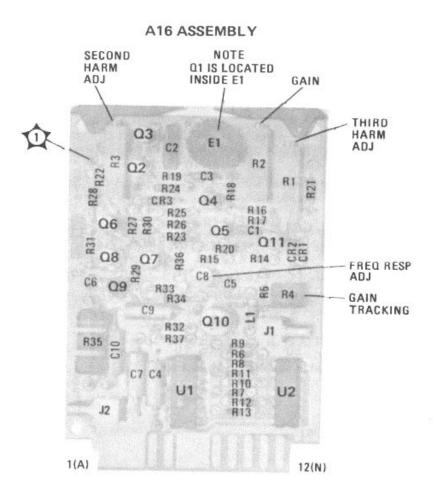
A16 Phase Modulator Driver Assembly Component and Test Point Locations (Change B
